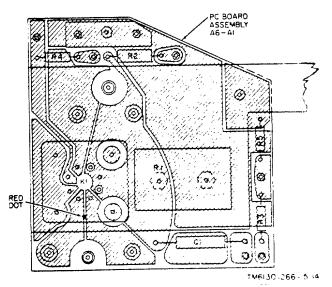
Terminal Board Assembly A6, (PP-6224/U) parts location.
